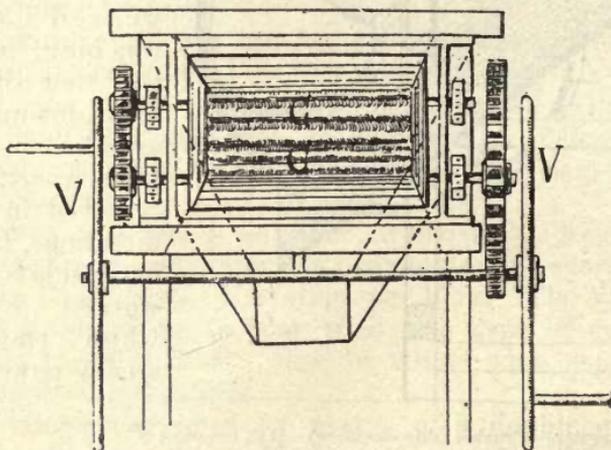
Blaquière's Crusher (top view).—G G, crushing cylinders; V V, crank wheels.
